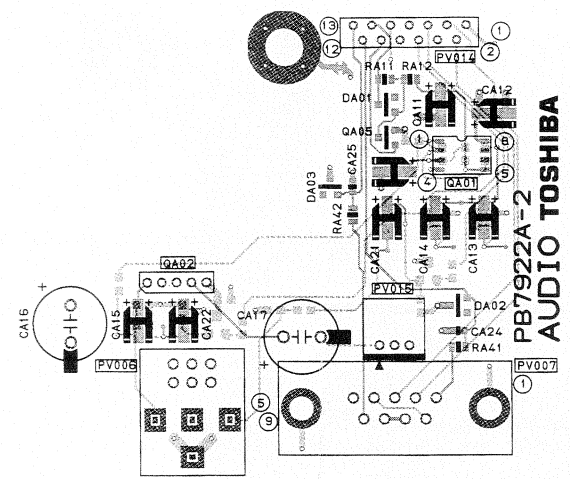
U0032 Audio PC Board (Top Side)
